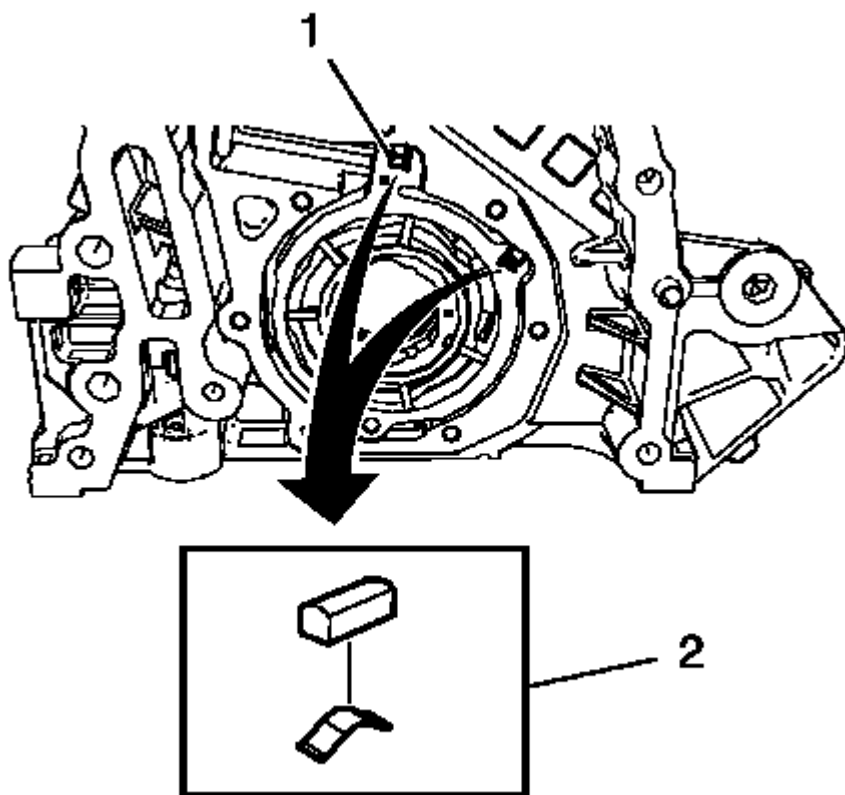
Oil Pump Slide Seal Springs And Grooves
